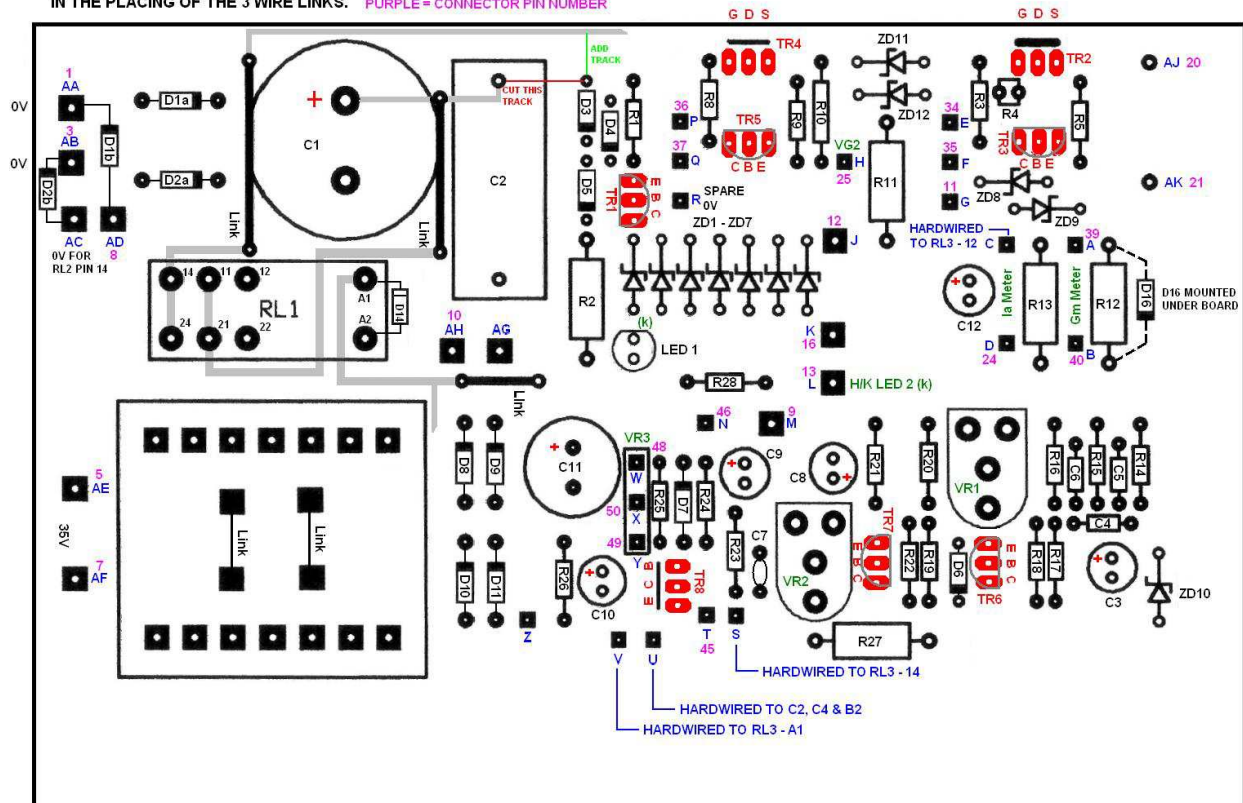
Main PCB Layout (note the changes between C2 and D3)
